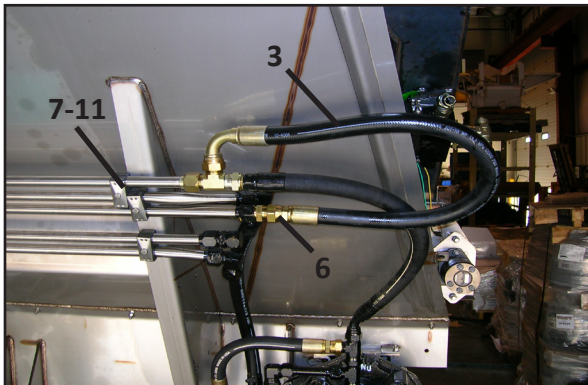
E – LH Hydraulics at Rear MICROBIN Removed
